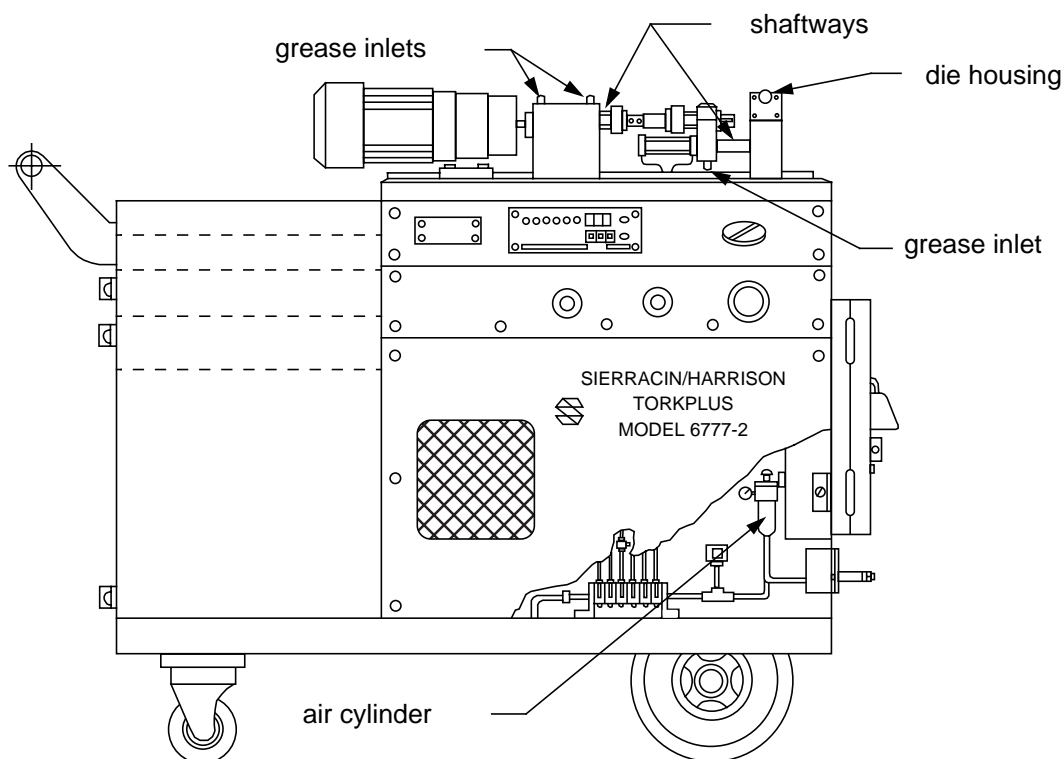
Components of the Sierracin/Harrison 6777 Swage Machine
